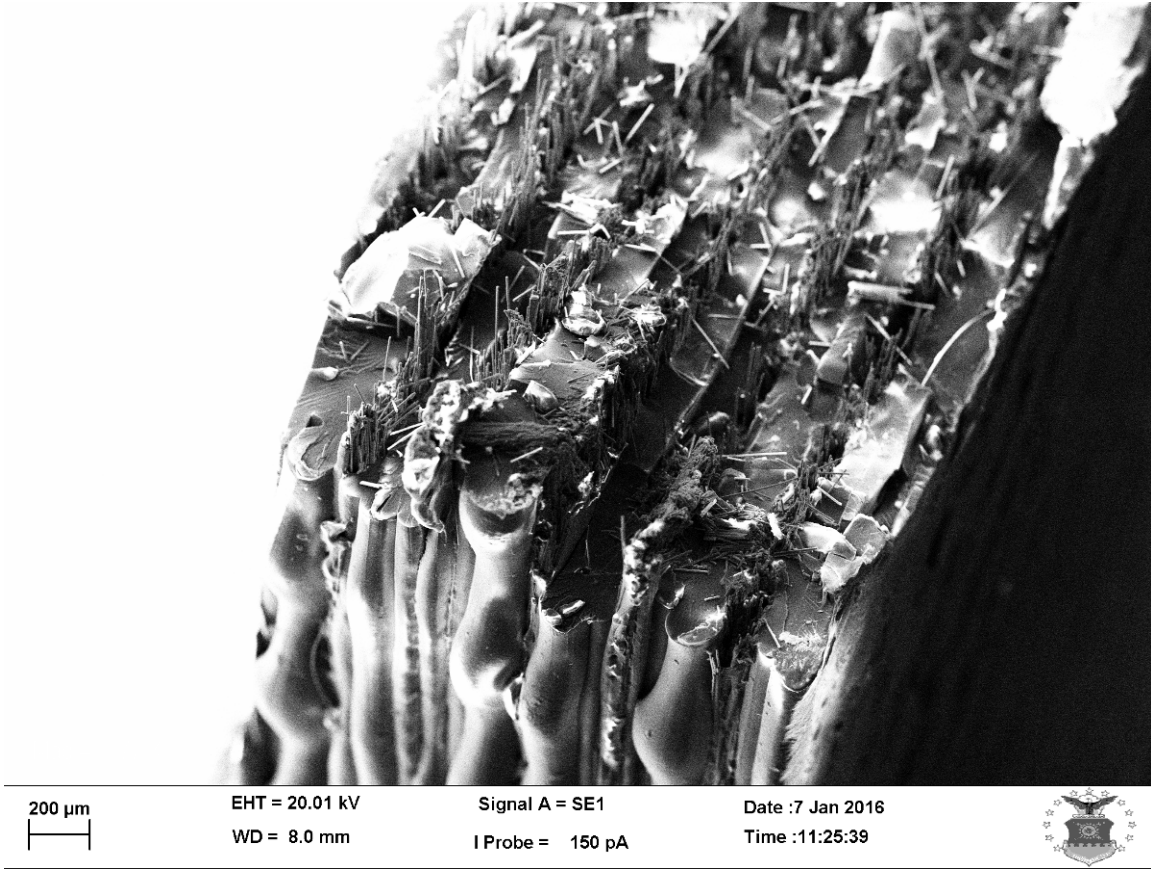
Fracture Surface of Continuous Carbon Fiber Nylon Composite Focusing on Side Edge of Specimen
